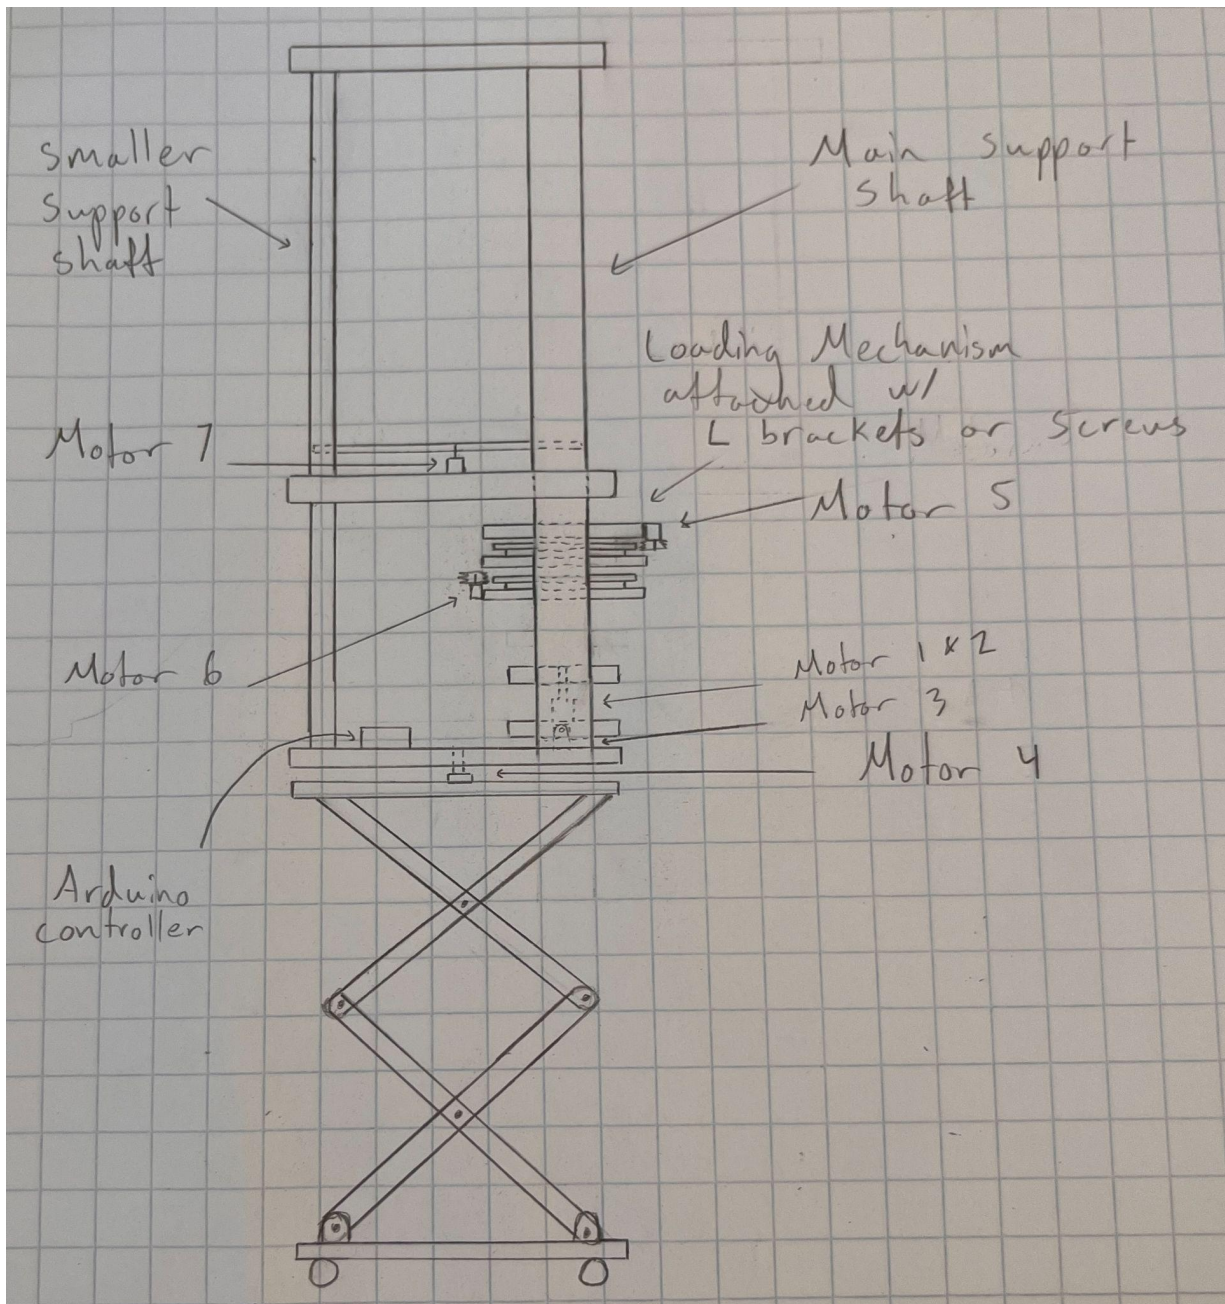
A: Side profile of final design for the Fly-wheel based shuttle launcher. It uses seven motors: motors 1 & 2 for the two fly-wheels; motor 3 for axial rotation; motor 4 for planar rotation; motor 5 & 6 for the diaphragm loading mechanism; and motor 7 to rotate a series of tubes filled with shuttles into the loading mechanism like a revolver's cylinder. The launcher will be mounted on a scissor lifted platform for adjustable height. Lockable wheels allow easy movement of the feeder. The launcher will be supported by two large main shafts and a thinner (and less load bearing) support shaft, all of which are connected to the rotating
